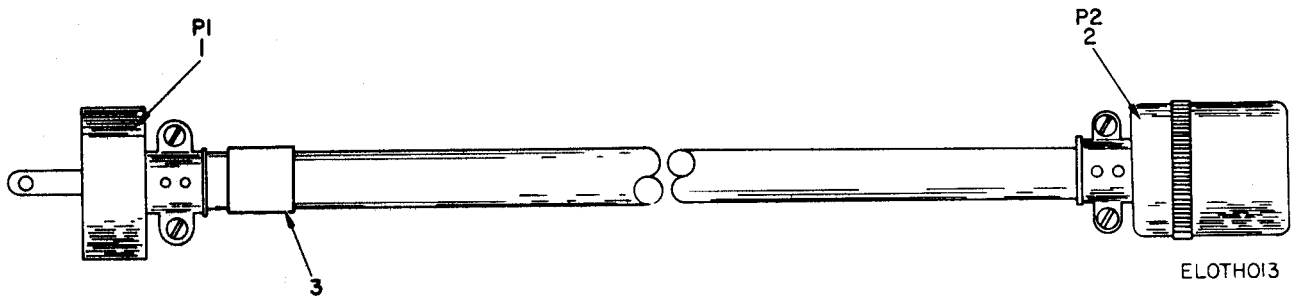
Cable Assembly CX-10469/U (AN/GMM-1A).
